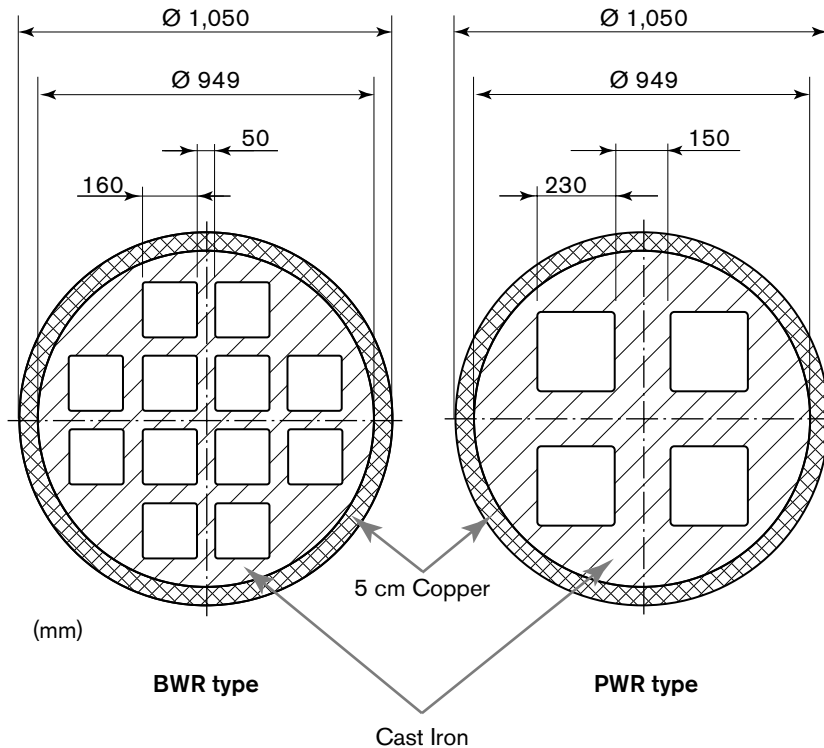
Dimensions of the cross section of the BWR and PWR canisters.
